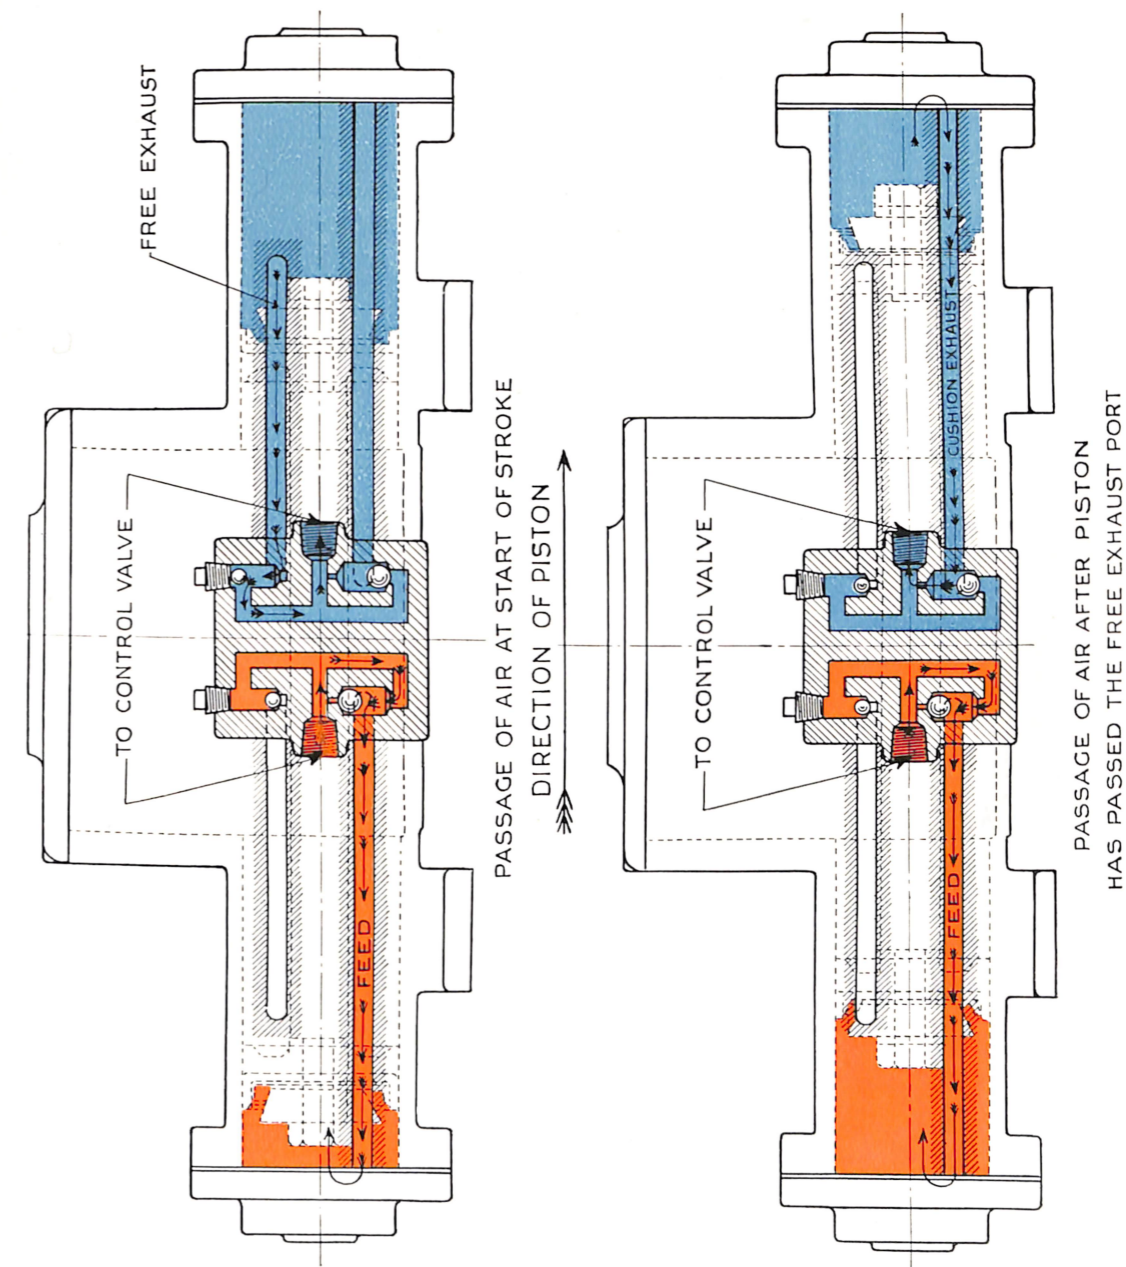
Diagram showing the passage of air through the ports of the Ball Checked Valve and Engine Cylinder.
